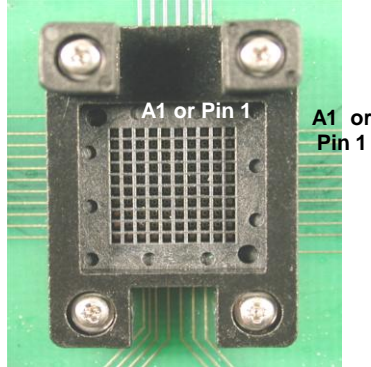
Check & adjust the alignment gauge for proper positioning on the PC board.
